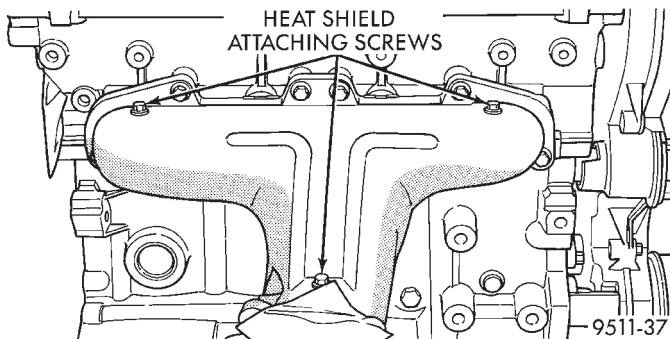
Exhaust Manifold Heat Shield—2.4L Engine
